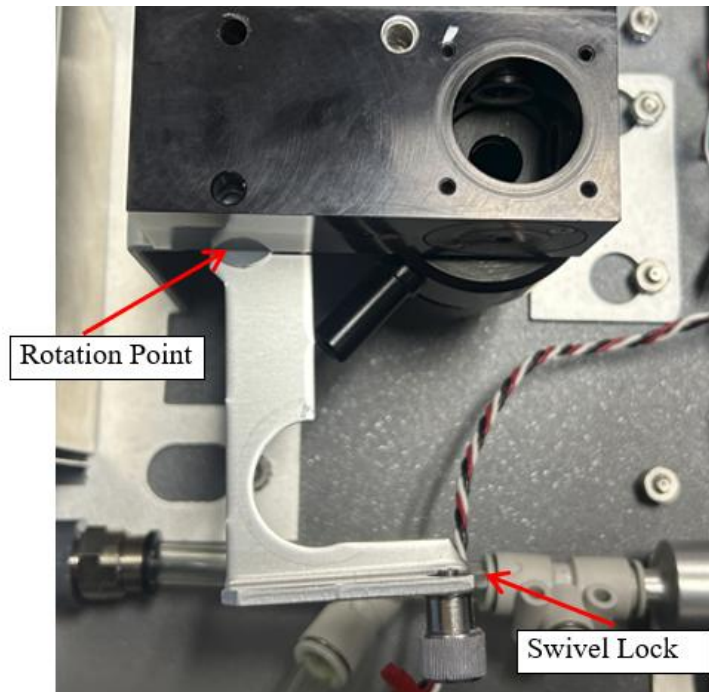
Bottom Chamber Removal, Swivel Lock
